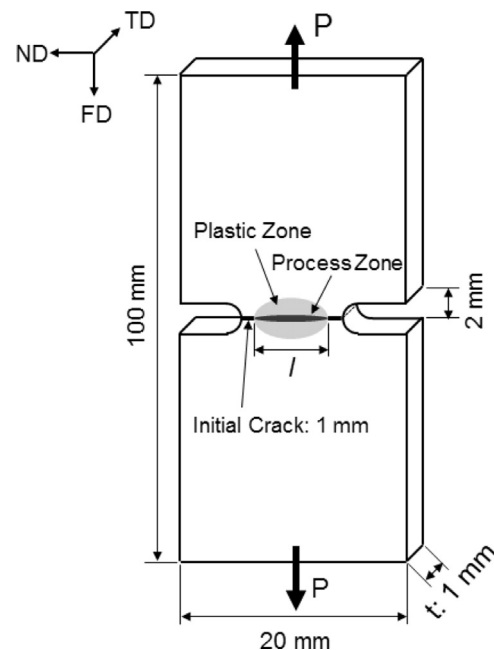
Schematic drawing of double-edge notched specimen for EWF test.
